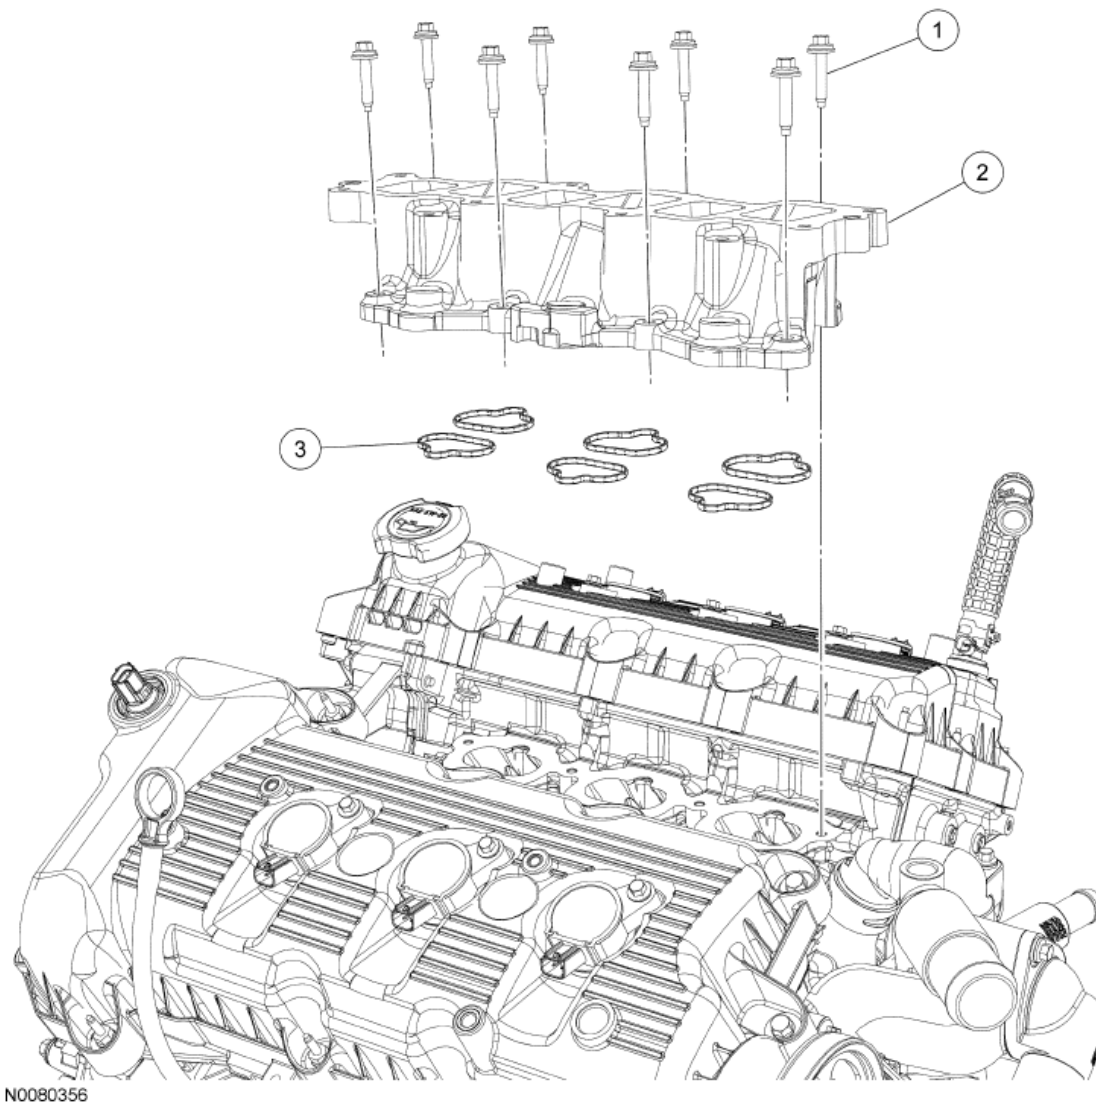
Identifying Lower Intake Manifold Bolts And Gasket
